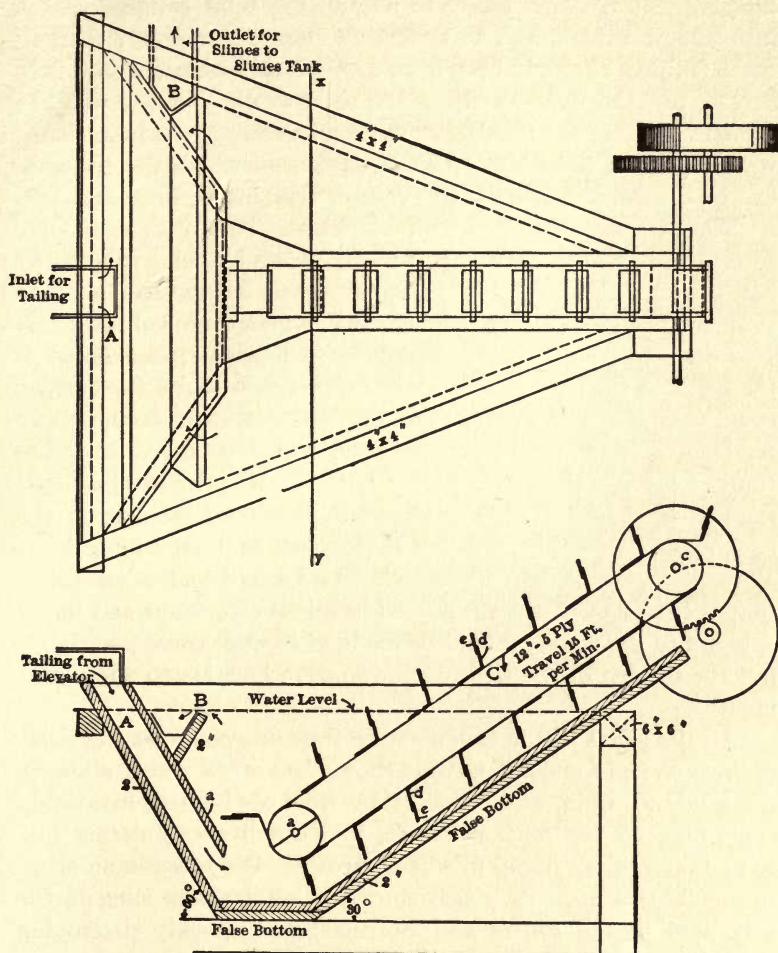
Sand-box in Water-saving Plant, Washington Mine.
